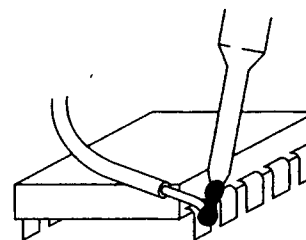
The small bit of transported solder will flow onto the IC pin.
